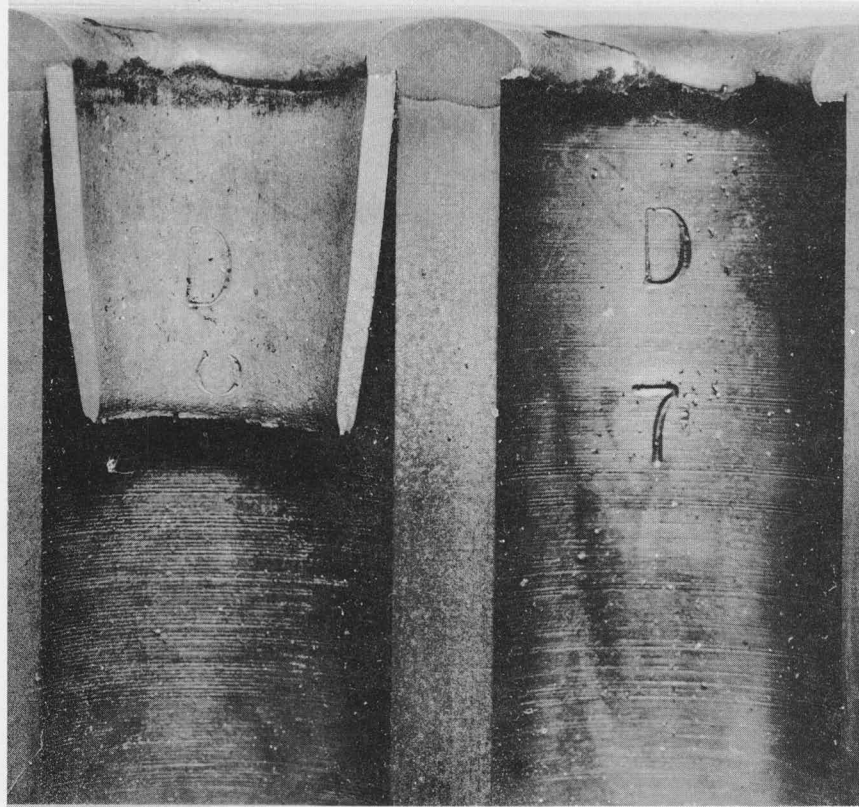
Single Pass Automatic Tungsten-Arc Weld Showing Incomplete Fusion of the Full Thickness of the Type 430M Tube.
